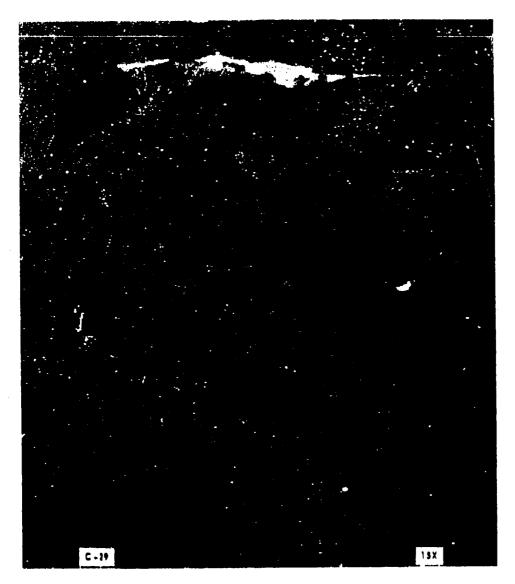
Brazed Specimen C-29 After Tensile Test. Arrow Points to One of the Cracks in the Stained Area. (Environmental-test conditions: 800 F, 130 ksi, no salt; duration: 63 cycles) (H-64892) Mag: 15X
